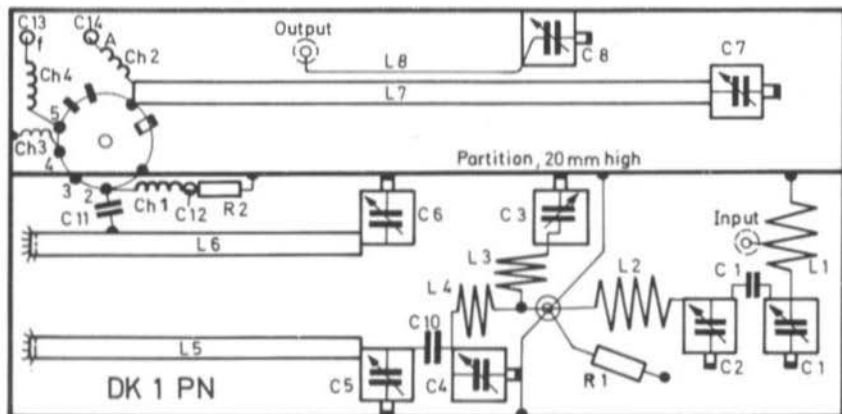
Mechanical assembly of the 70 cm transmitter (from below)
